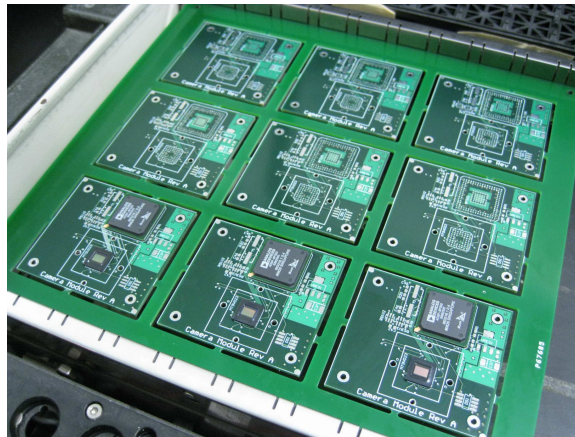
The PCB panel contains 9 individual Black Spot boards. Here the front three have been loaded with the BGA parts.
